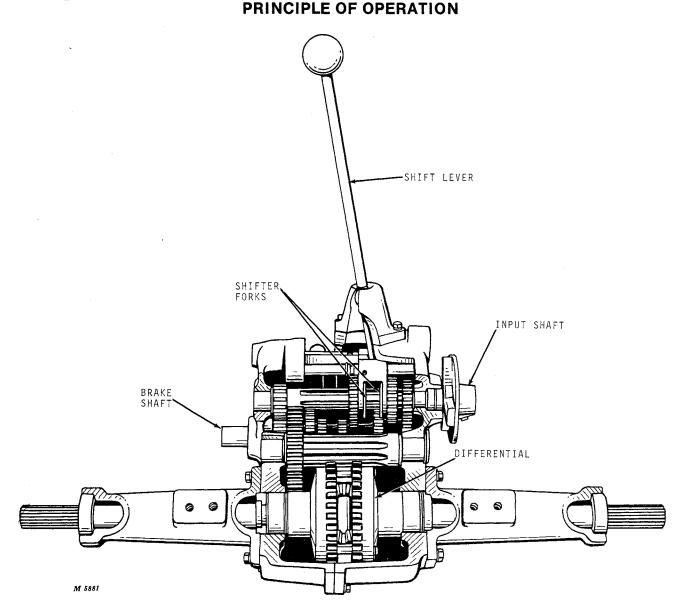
Tractor Transaxle - 4 Forward Speeds - 1 Reverse
